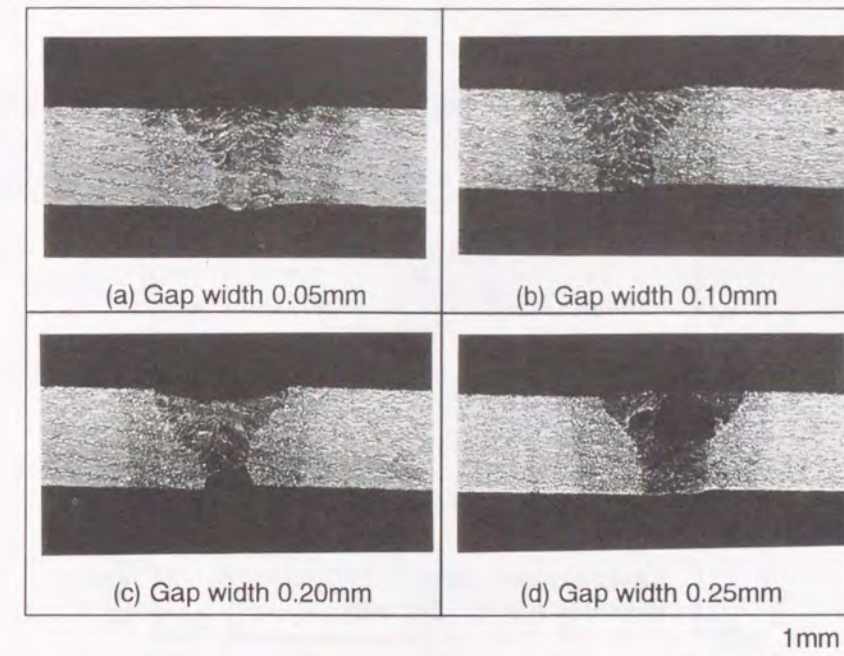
Transverse macrosection of weld metal (Sheet thickness 0.7mm)
